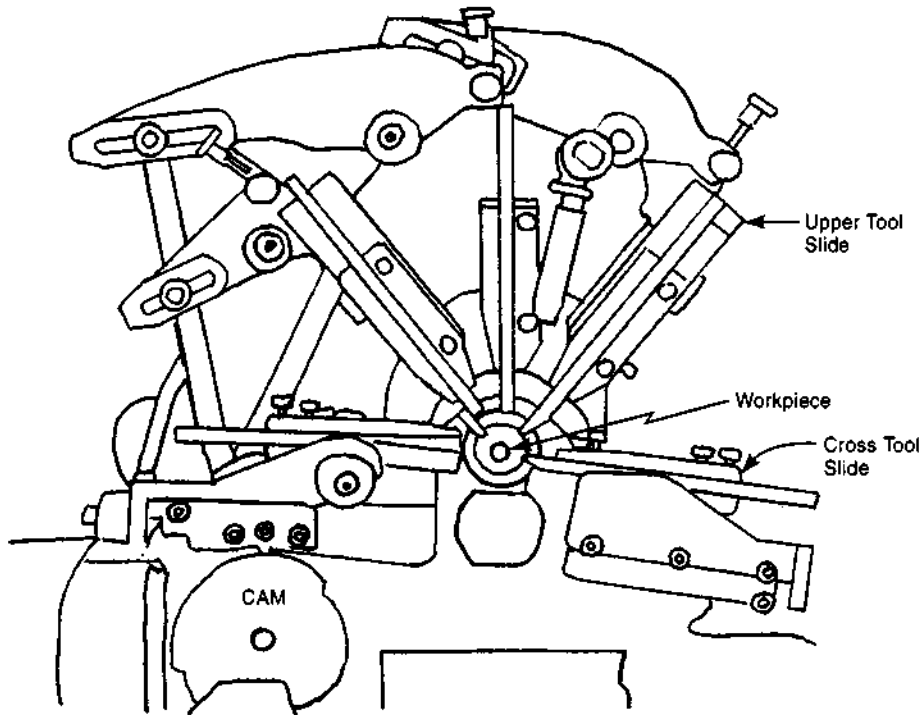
A2c2 Swiss-type screw machine. Cutting tools are arranged radially around the machine spindle. Tool infeed is controlled by cams. Longitudinal feed is provided by moving the spindle head.
